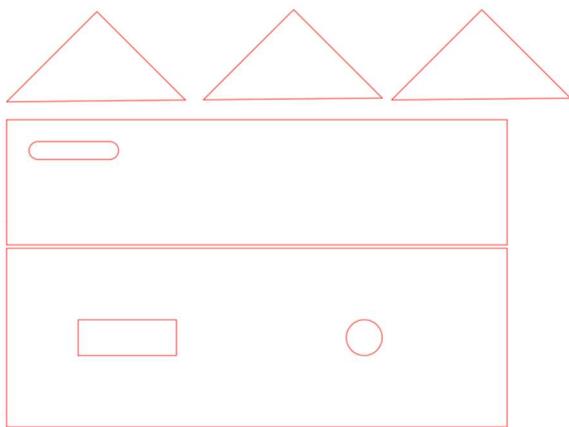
The AutoCAD laser cut file for the control panel parts.
